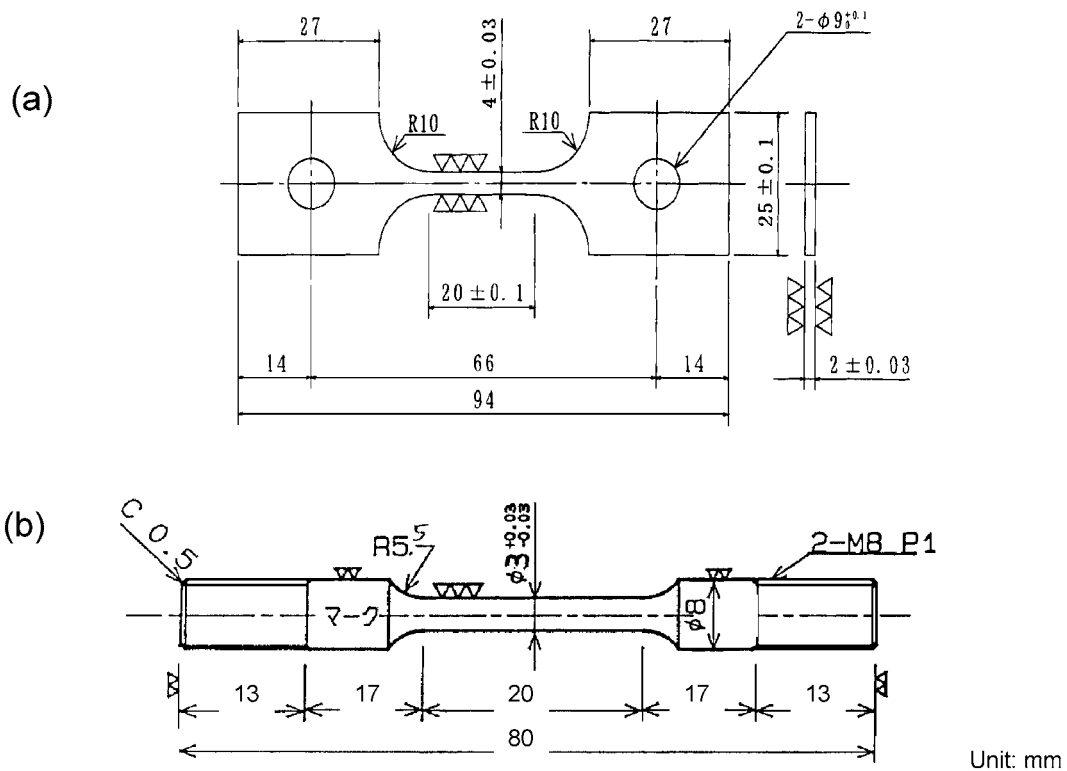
Shape and size of SSRT test specimen. (a) plate, (b) round bar.
